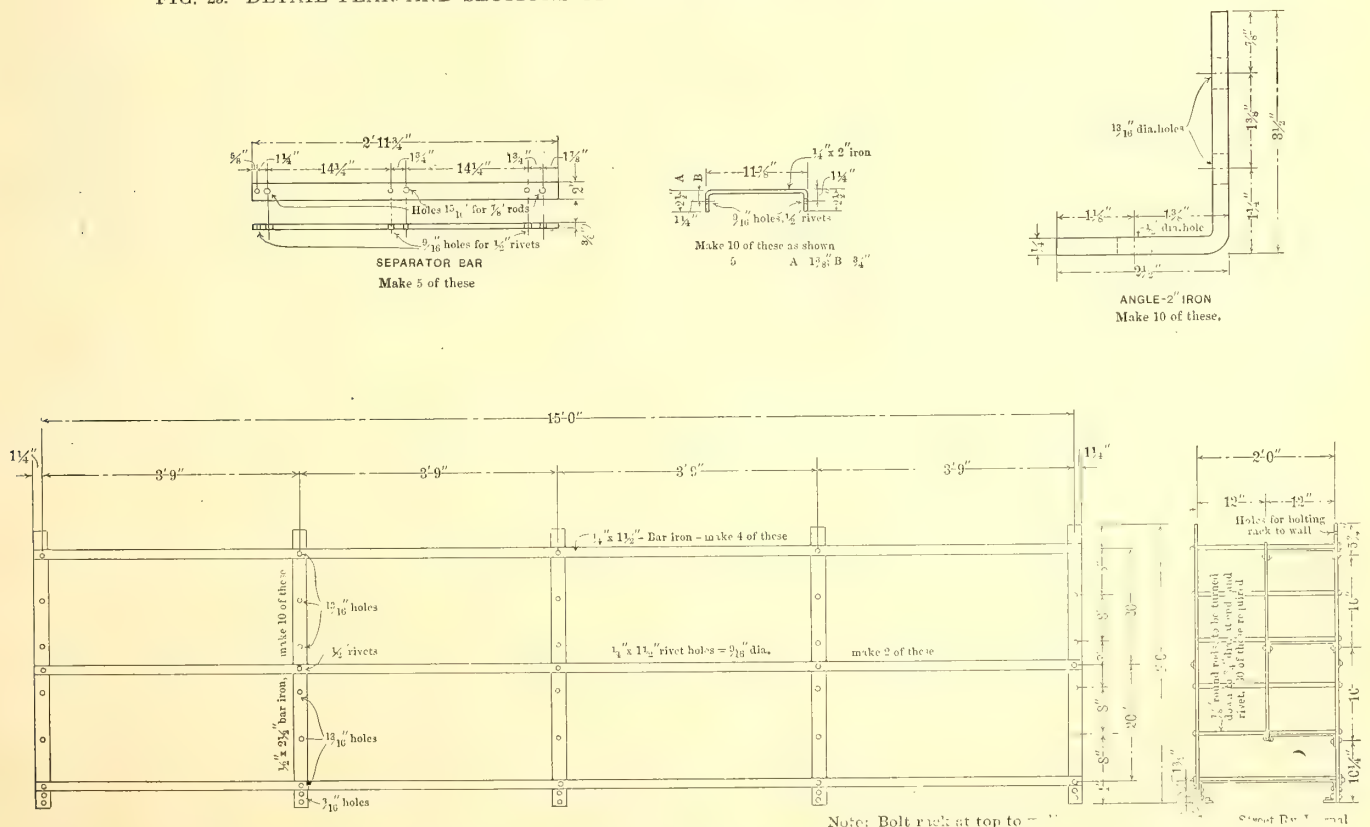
CONSTRUCTION DETAILS OF IRON RACK USED AT THE THIRTY-SIXTH STREET SHOP FOR STORING TROLLEY-POLE TUBING AND THE LIKE
